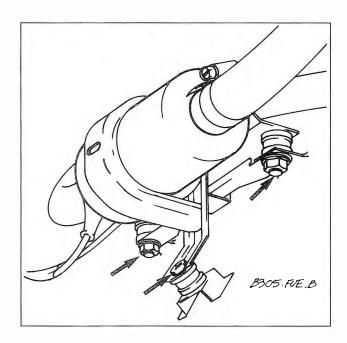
Fuel pump bracket mounting points (arrows).
